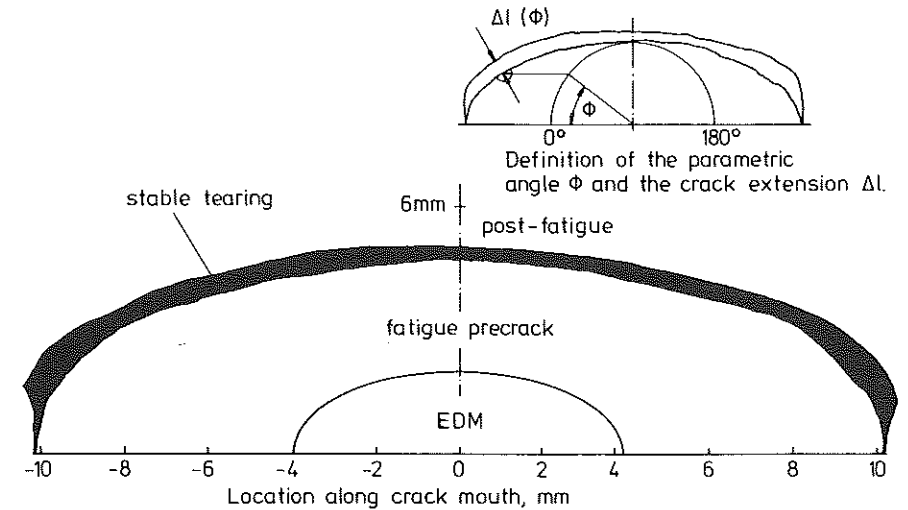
Fracture surface of a surface crack tensile panel showing the electrical-discharge-machined notch, the fatigue precrack, and a zone of stable tearing followed by post-fatigue
